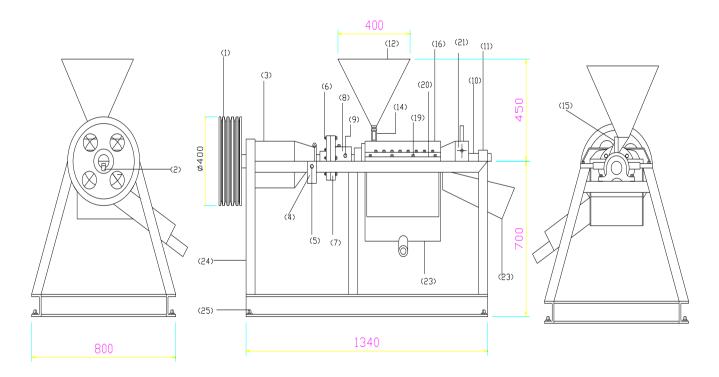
Orthographic Projection Of The Palm Kernel Oil Expeller Machine
